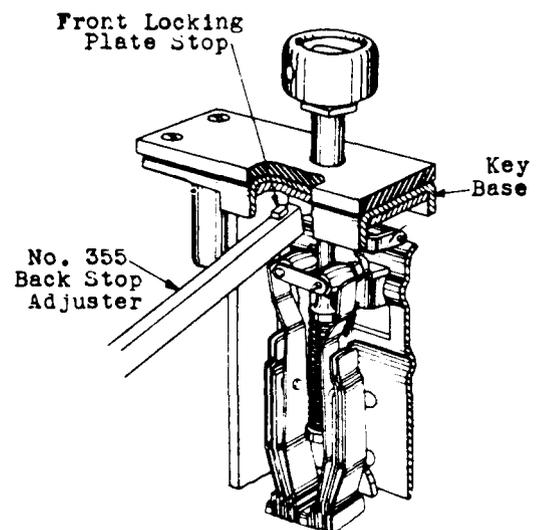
Method of Adjusting Front Locking Plate Stop
